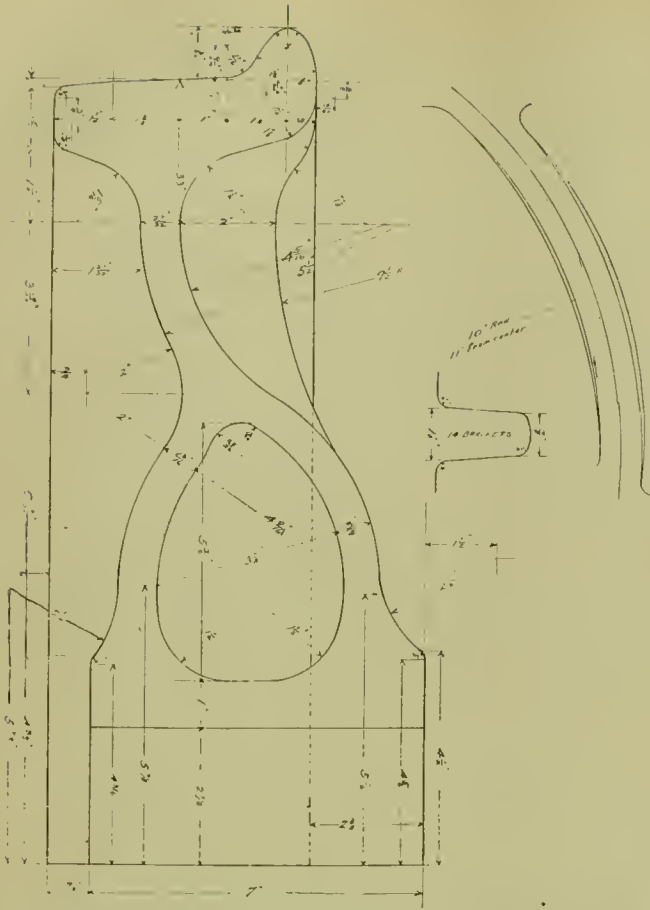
33 IN. 690-LB. CAST IRON WHEEL FOR 60,000-LB. CARS.
